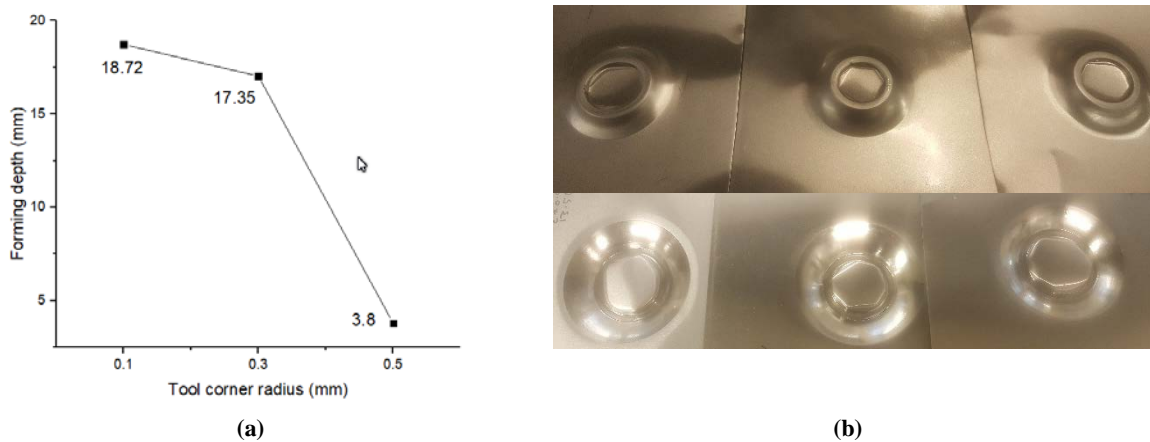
(a) Forming Depth in relation to tool corner radius, (b) Undesired formed part
